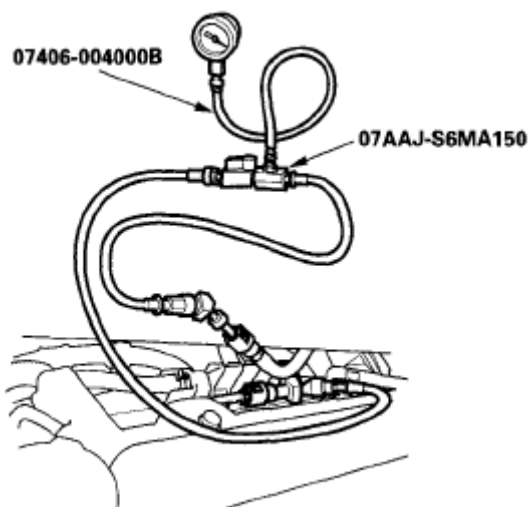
Attaching Fuel Pressure Gauge Set And Fuel Pressure Gauge
